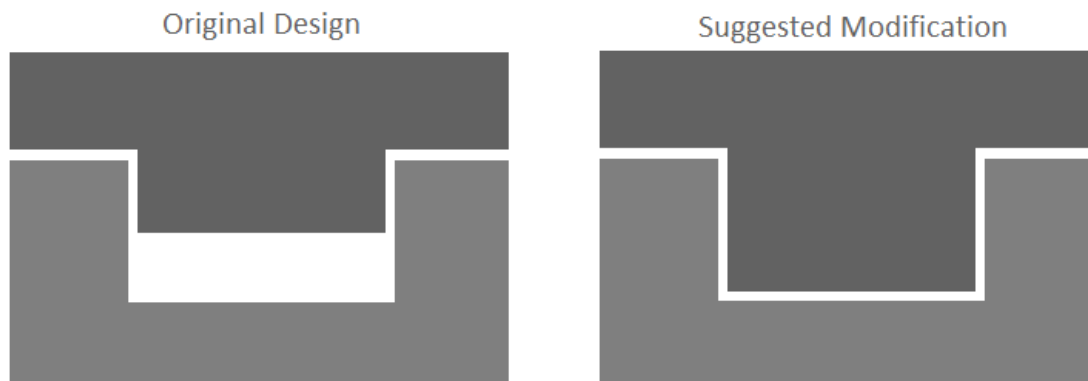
When under filled, the original design allowed the faces of the mold to come into contact, reducing the pressure transmitted to the specimen. Modifying the mold to remove this clearance would allow more consistency in pressure transmission to the specimen at the expense of dimensional consistency.
